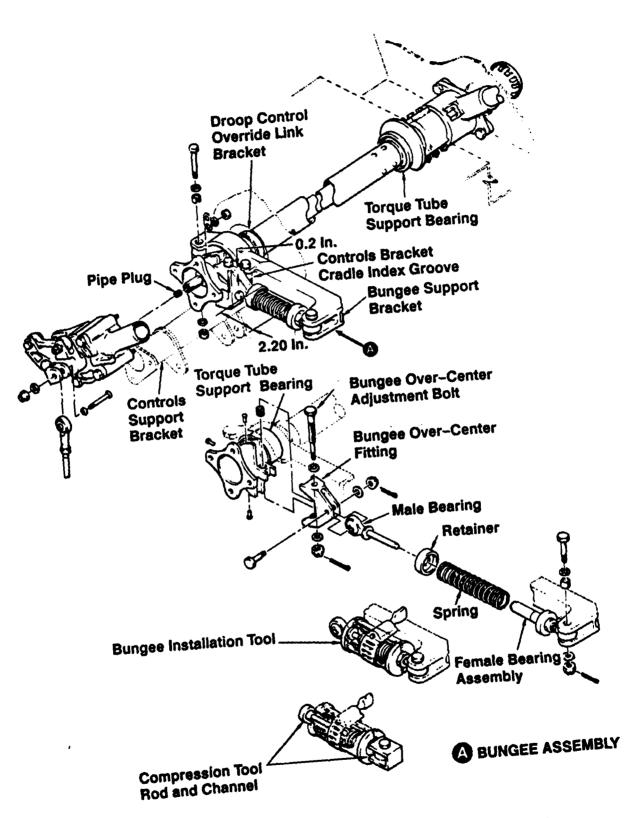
Collective Torque Tube, Gas Producer Torque Tube, Collective Bungee
